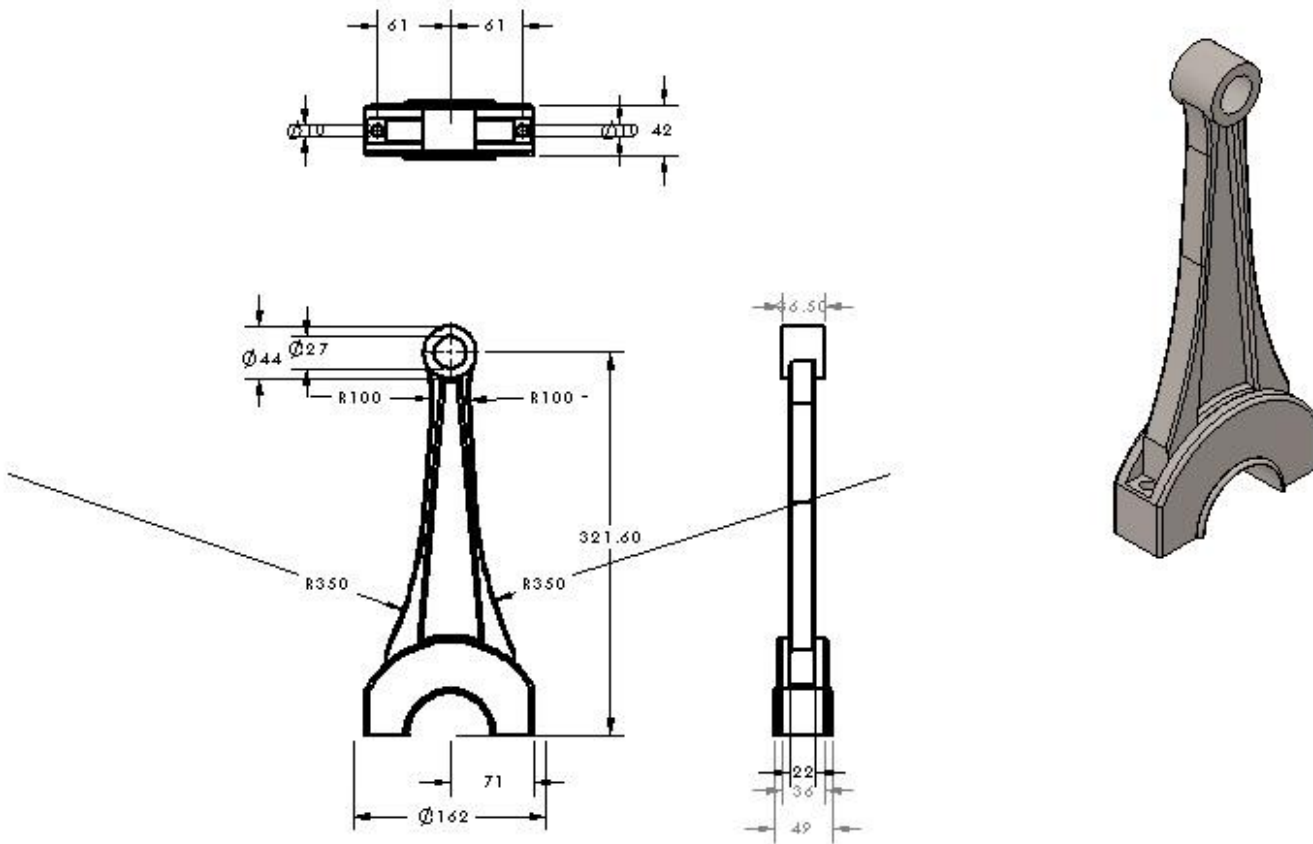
SOLIDWORKS drawing of the connecting rod
